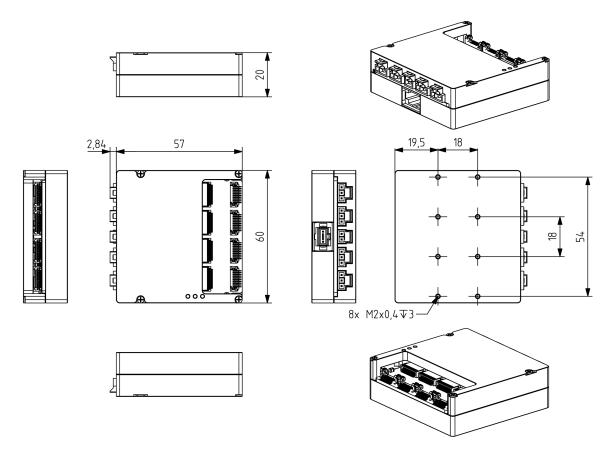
ADPT-4P-X2G3-FF-X8G3-MTP dimensional drawings
